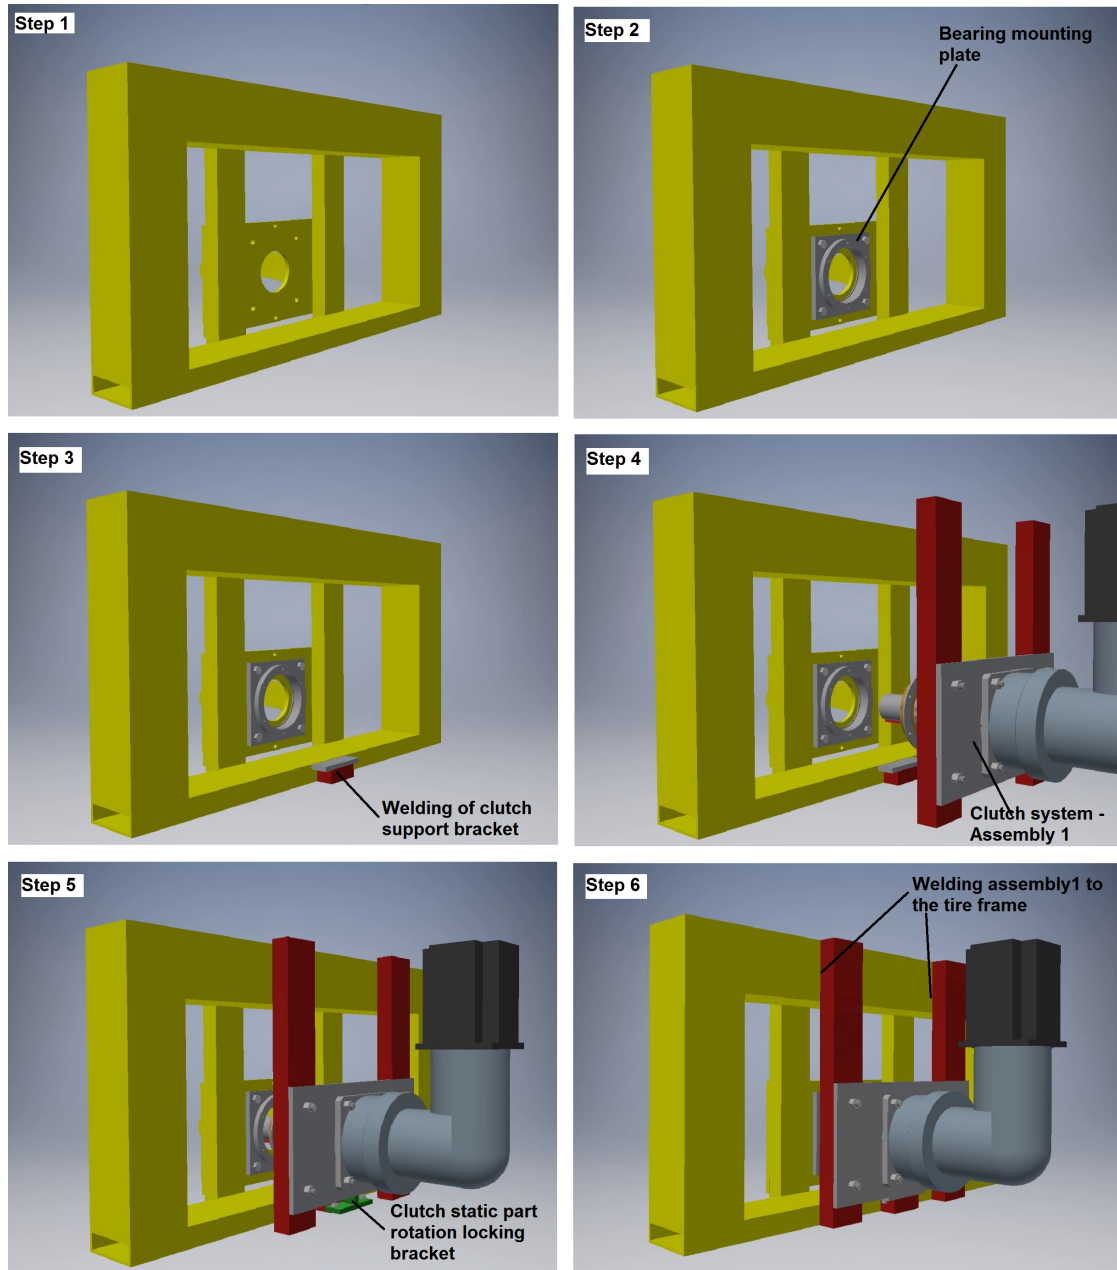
Procedure for assembly-2 of the clutch system - welding of assembly 1 on the tire test frame.
